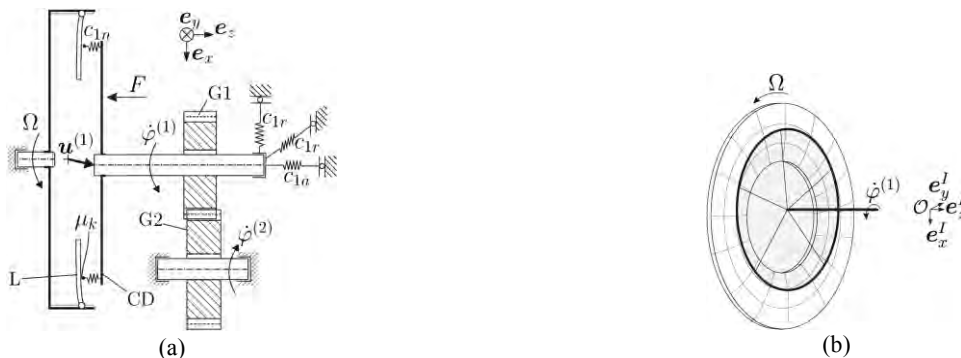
(a) Model of the shifting gearbox with a flexible lamella L; (b) contact between the lamella and the eccentric friction disc.
